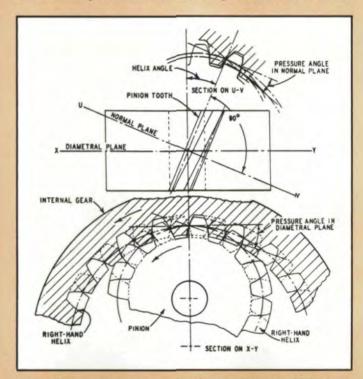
Diagram giving notation of tooth parts of an internal helical gear and pinion.
